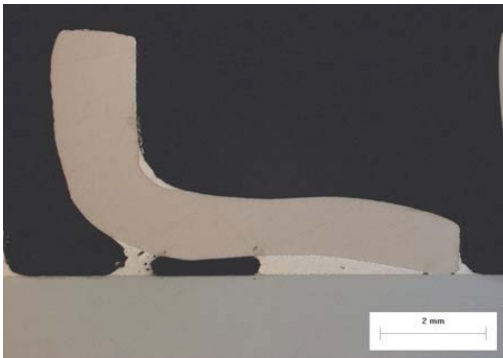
Assembly #2 Braze Joint Voids with Bowed Fin Leg
